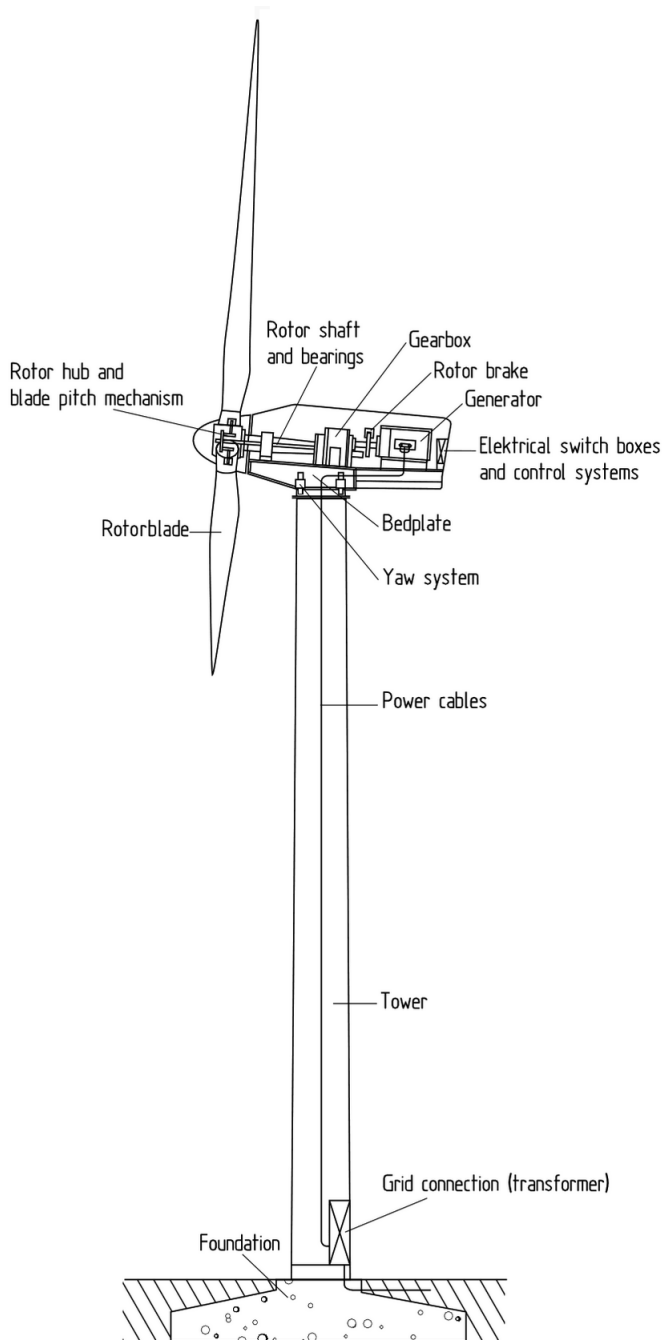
Complete exemplary wind turbine with conventional tubular steel tower and gravity slab foundation from Hau [92, p. 73]
